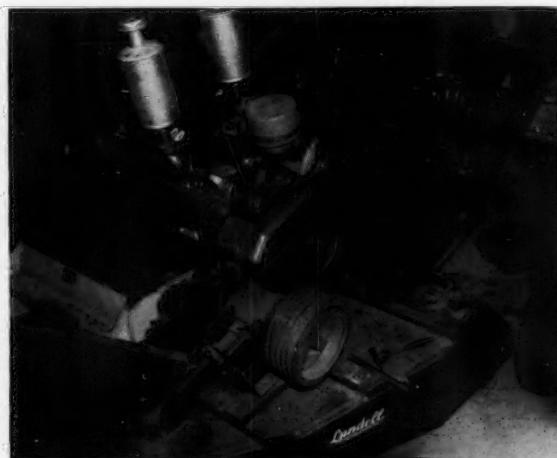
This view shows how the manifolding from the hydraulic system is attached to the pressure-regulating cylinders which press against the sides of the adjustable wafering chambers. (The plate separating the wafering chamber from the ejection chamber is shown in place)
